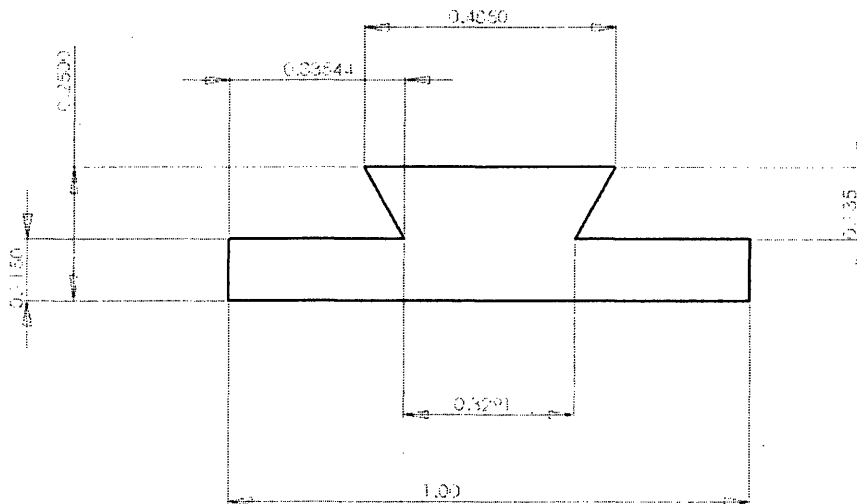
A drawing of the cross-section of the male dovetail used in this work.
